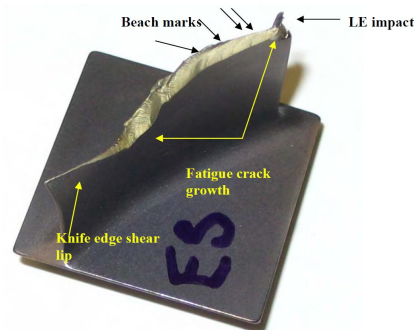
Failed HPC blade due to continued operation after impact with a rivet head. G. Morse, "Analysis of Engine Damage - Engine SN 451-133," Failure Analysis Service Technology, Inc, 2007. Used under fair use, 2014
